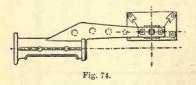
shows the connection between the part of the frame with the bored out guides and the main crankshaft-bearing, the straight line forms shown in the figure, makes the pattern simple ;
